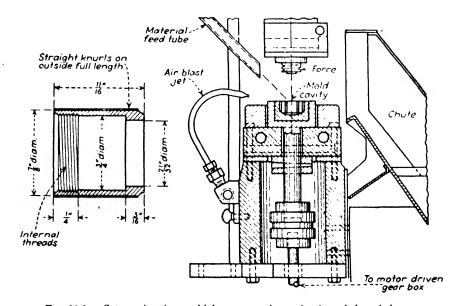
Set-up showing mold for automatic production of threaded caps.
